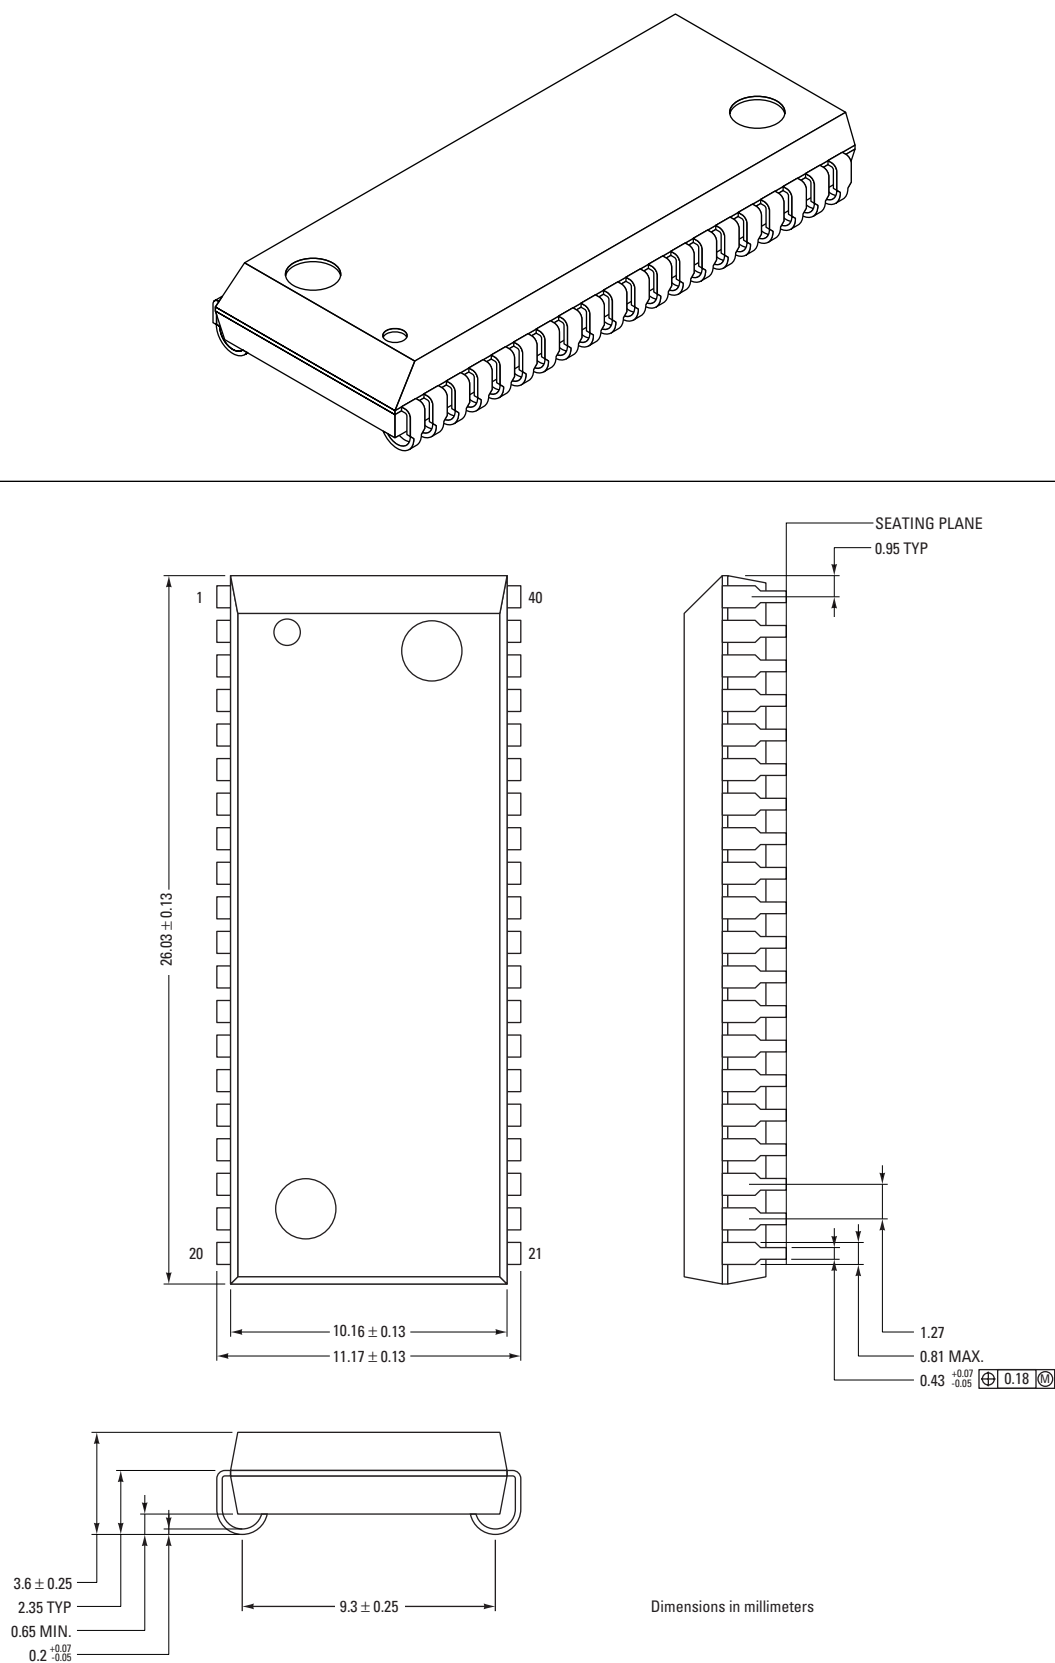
40-Pin 400 mil SOJ Package Dimensions
